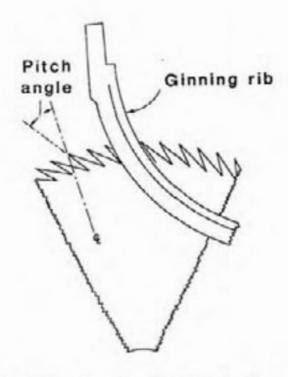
Leading edge of the tooth should enter the ginning rib surface, or the point of the tooth should lead the throat slightly.
